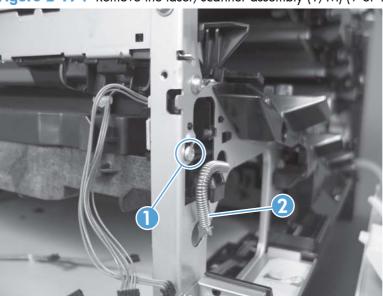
Remove the laser/scanner assembly (Y/M) (9 of 12)
